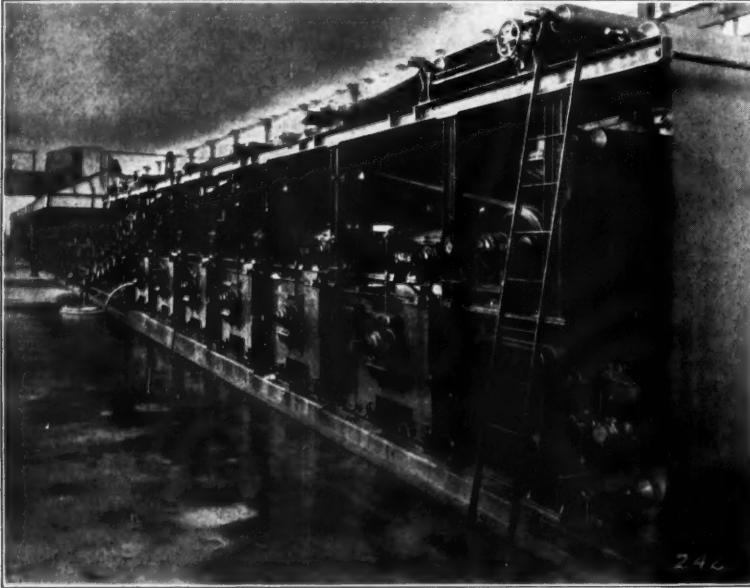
Showing the vat end of a six-cylinder Downingtown paper board machine. This unit is equipped with Anti-Friction bearings throughout.
